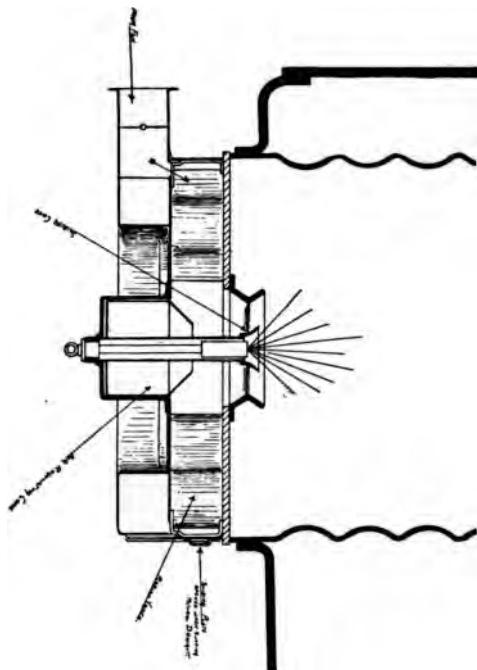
Arrangement of Furnace for Forced Draught with White Patent Burner.
